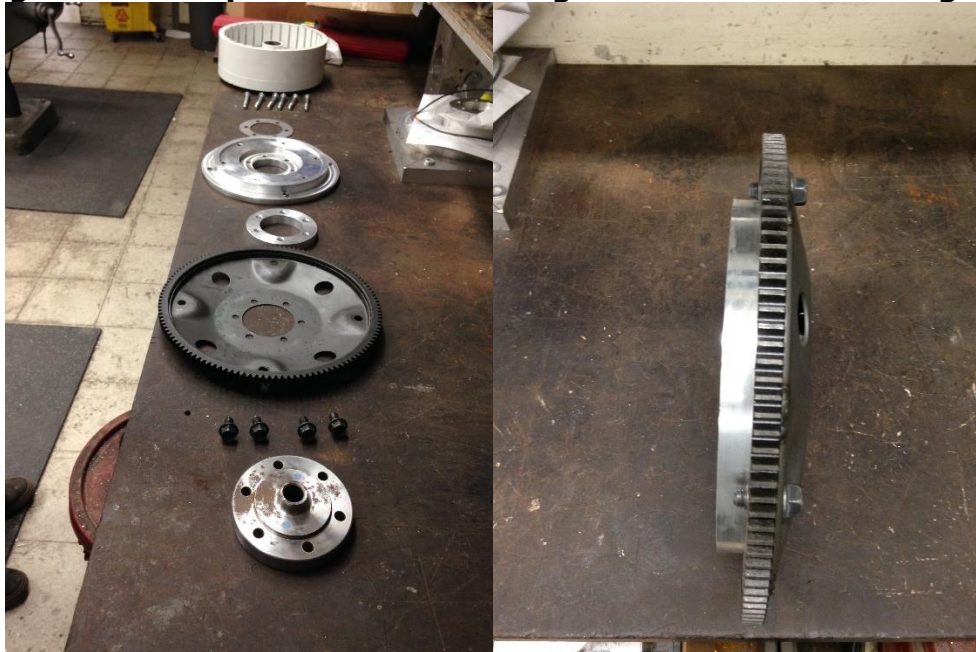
shows the original adapter before welding on the left and the single billet adapter on the right. Figure 12 shows the components necessary to mount the alternators magnetic rotor (top of left image) to the engine and them assembled.
